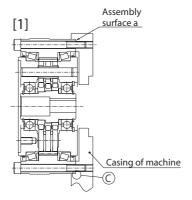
Assembly procedure A series F1C type (assembly example 2)
